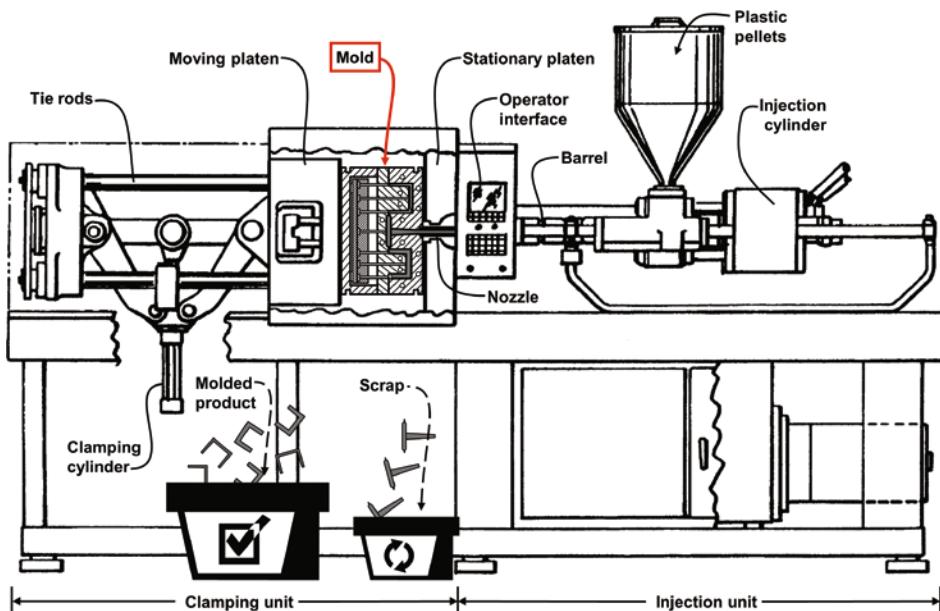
Depiction of an injection molding machine and mold, adapted from [2]
